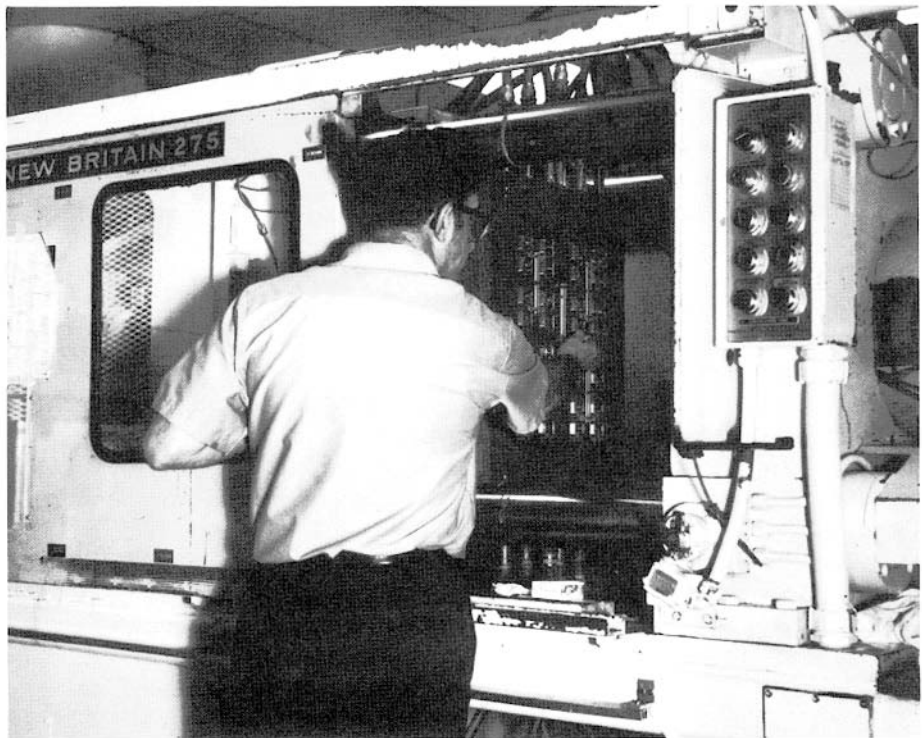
Machine operator removing "shot" from a 32-cavity optical component mold.
